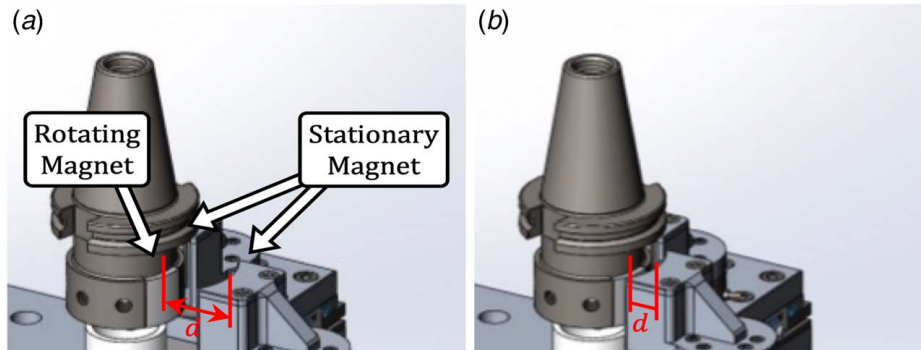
Illustration of a magnetic assembly located to yield a (a) relatively low tool-to-workpiece force or (b) relatively high tool-to-workpiece force
